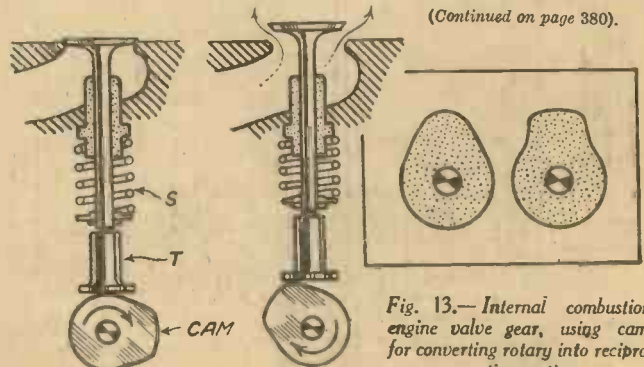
Internal combustion engine valve gear, using cams for converting rotary into reciprocating motion.
